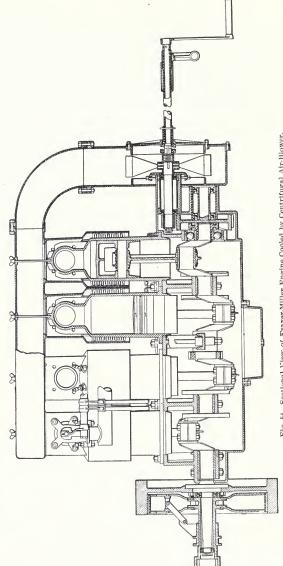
Sectional View of Frayer-Miller Engine Cooled by Centrifugal Air-Blower. Oscar Lear Automobile Company, Columbus, Ohio.
